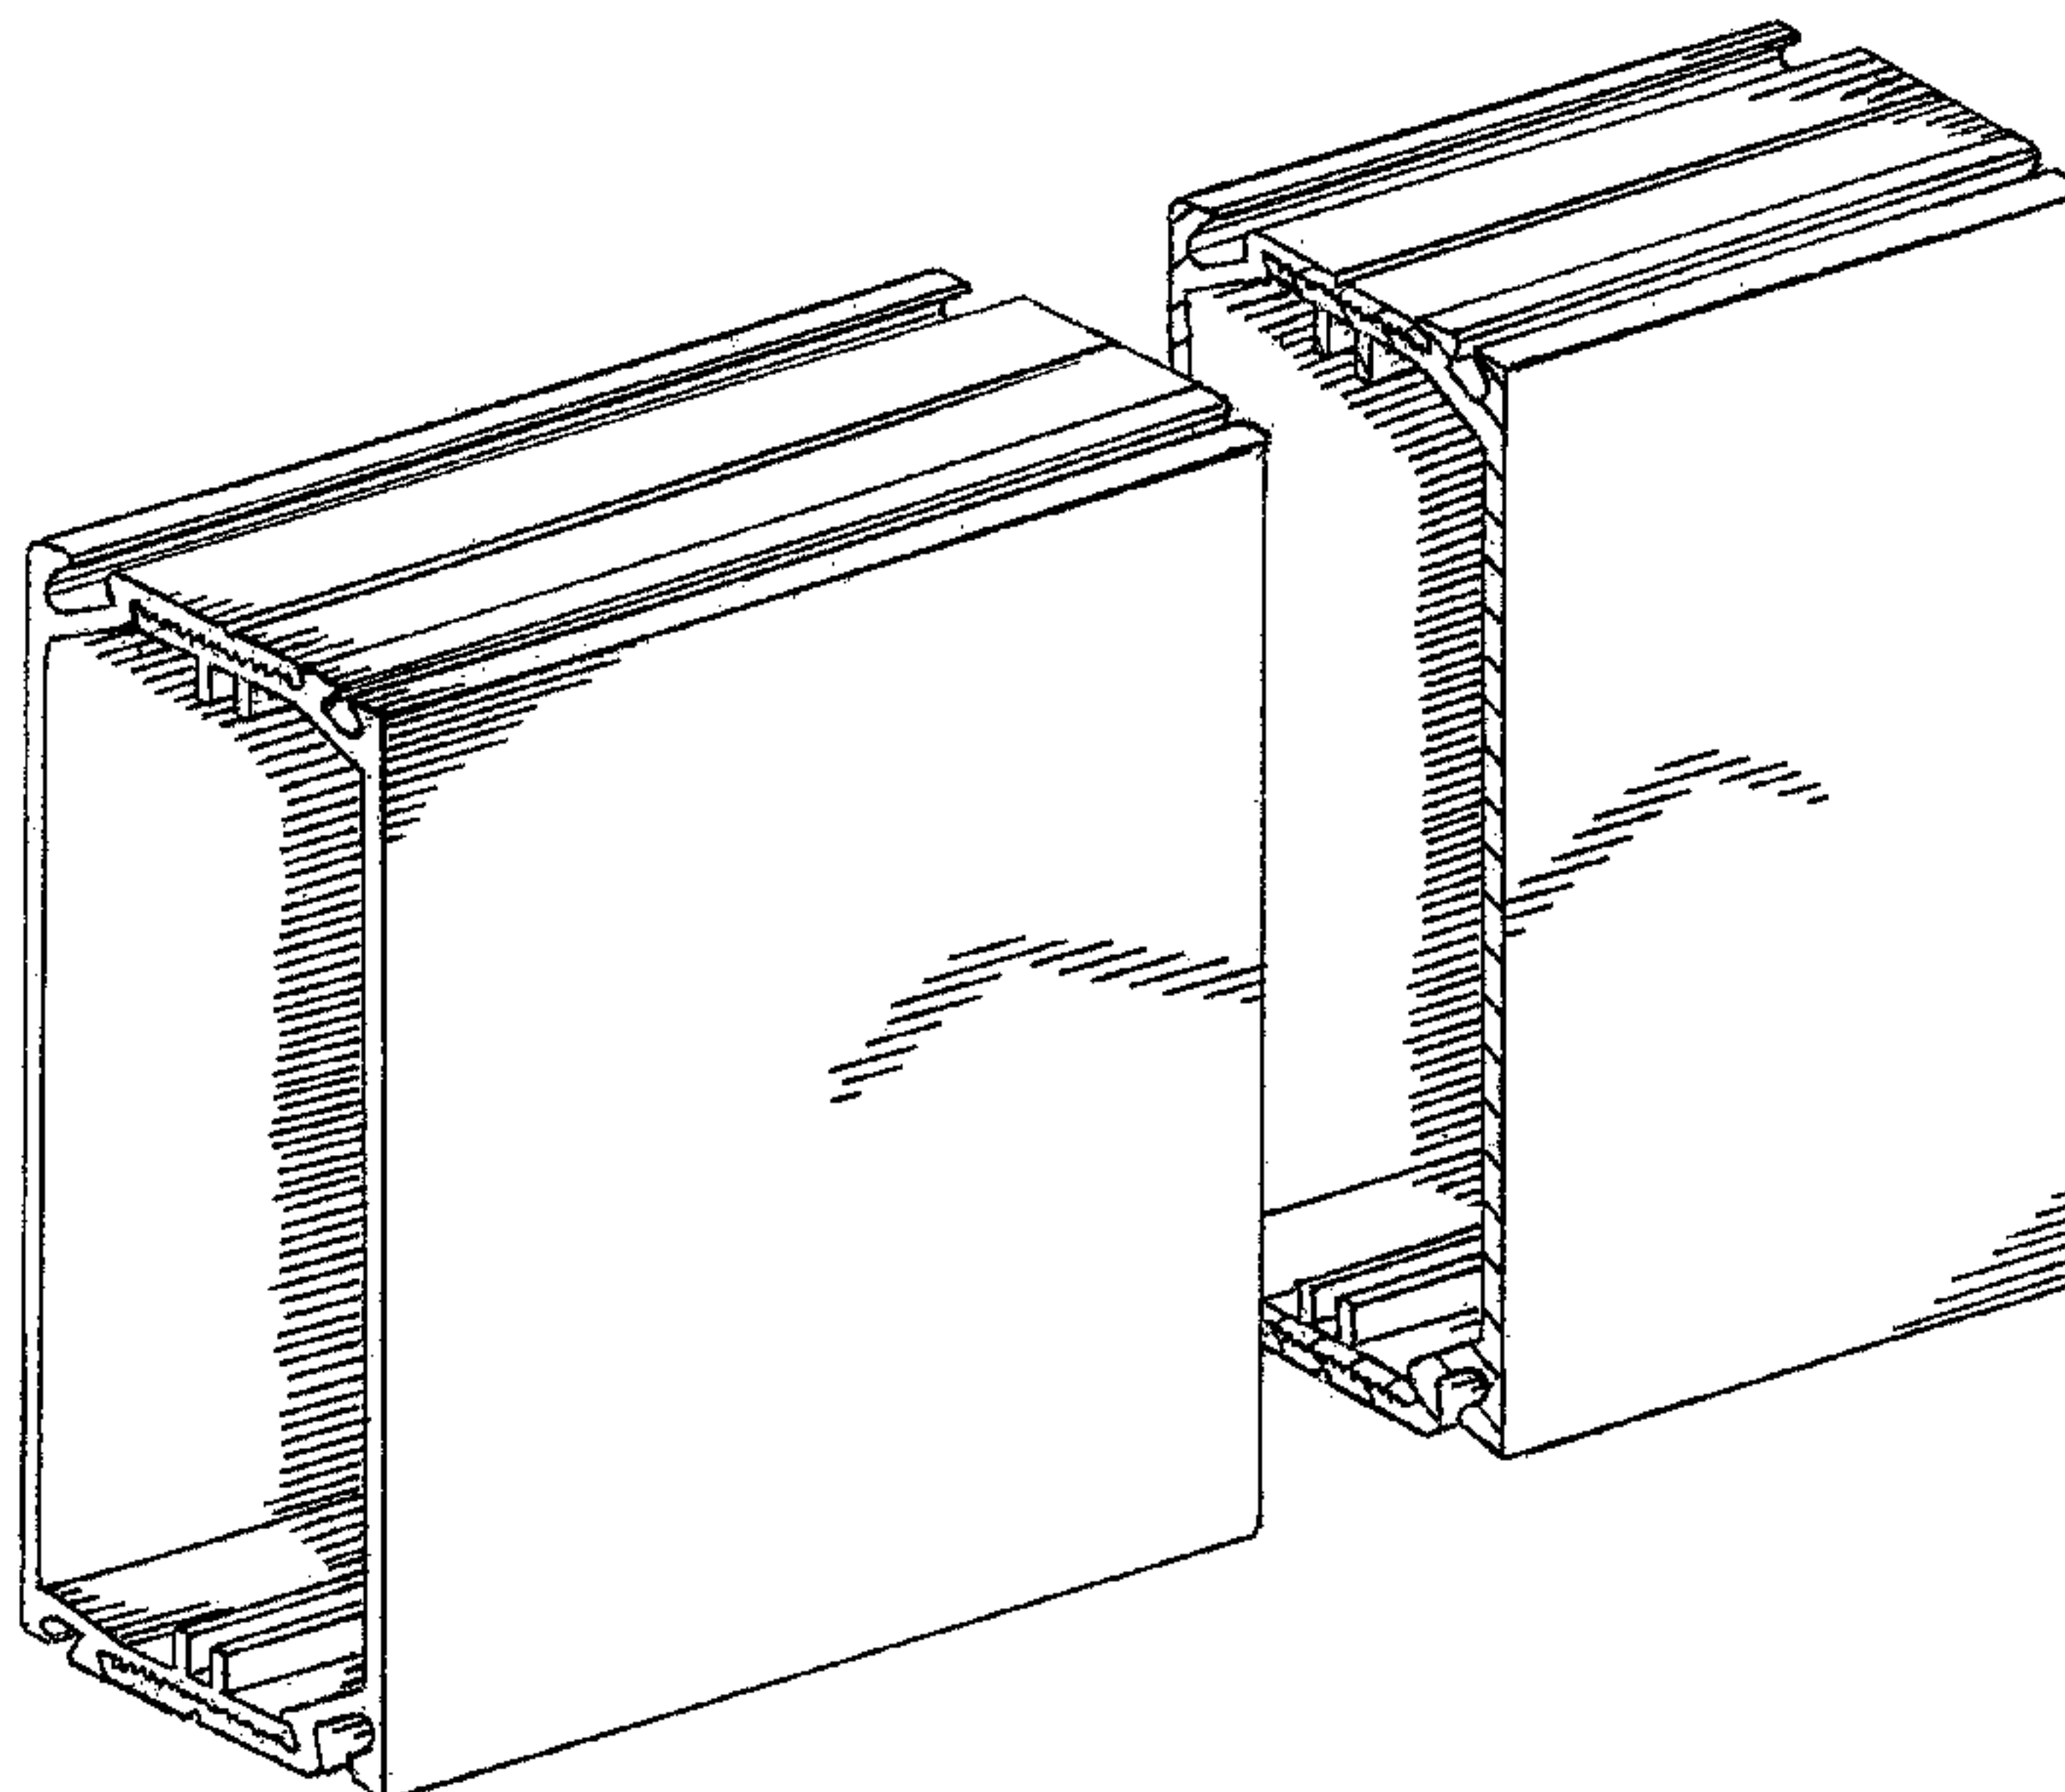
is a fragmentary right side view of the assembly shown in FIG. 2;
